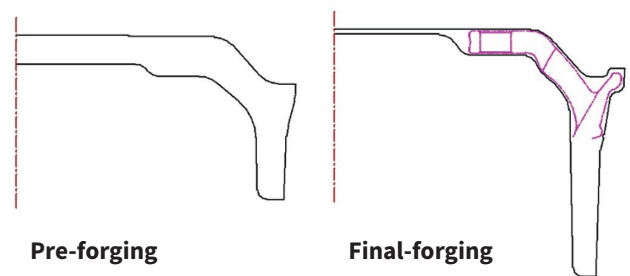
Forging process design steps include pre-forging and final-forging.
